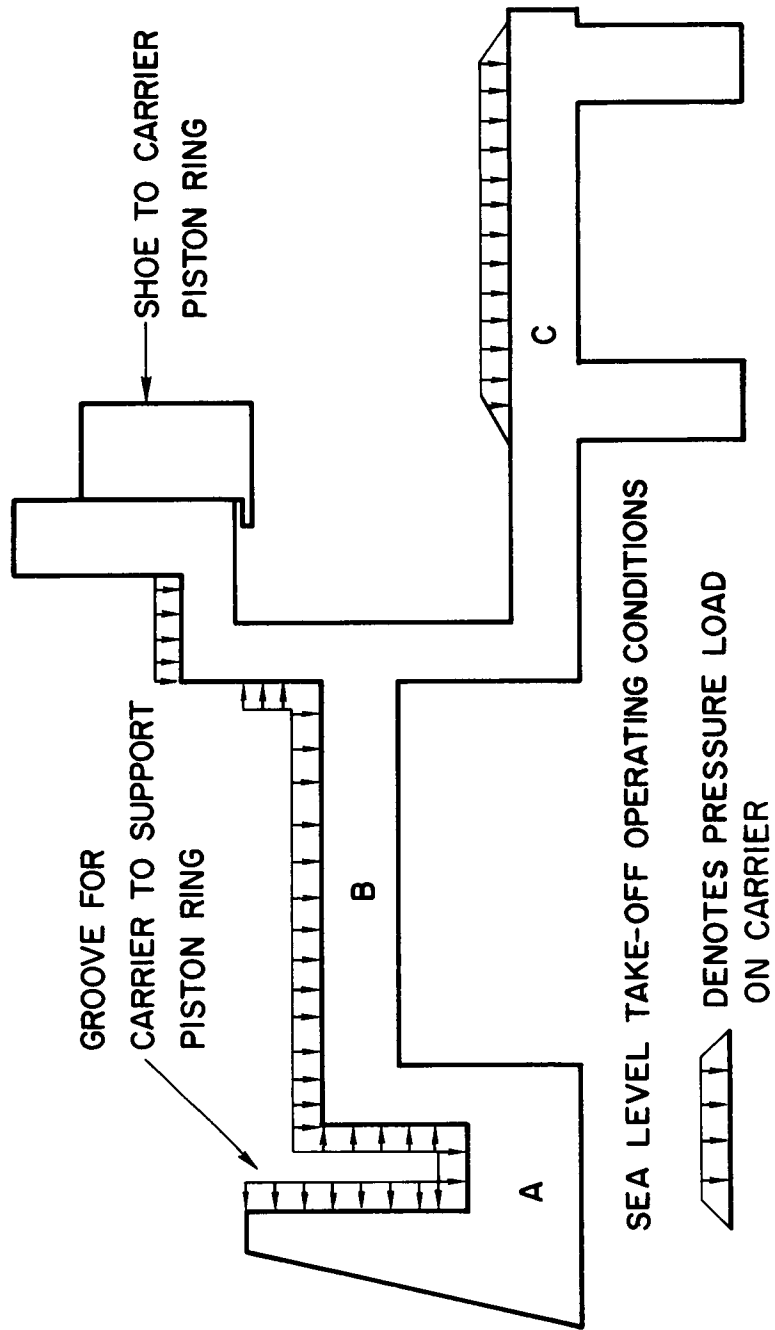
Seal Carrier Deflection with Piston Ring Groove in Seal Support and Carrier at Inner Extreme of the 0.4" Axial Travel
